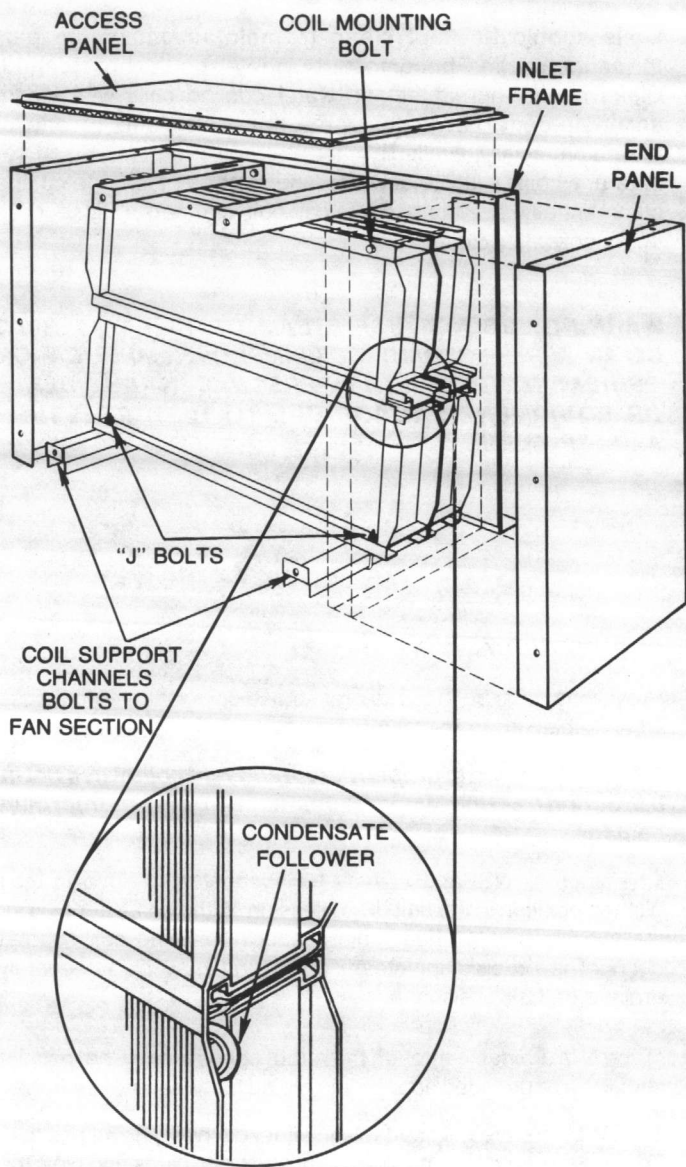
Draw-Thru Coil Section Details with View of Condensate Follower
